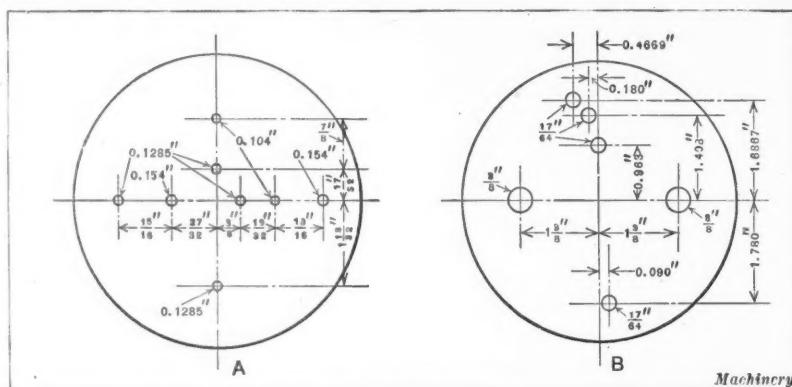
(A) Part drilled on Machine shown in Fig. 2. (B) Part drilled on Machine shown in Fig. 3
